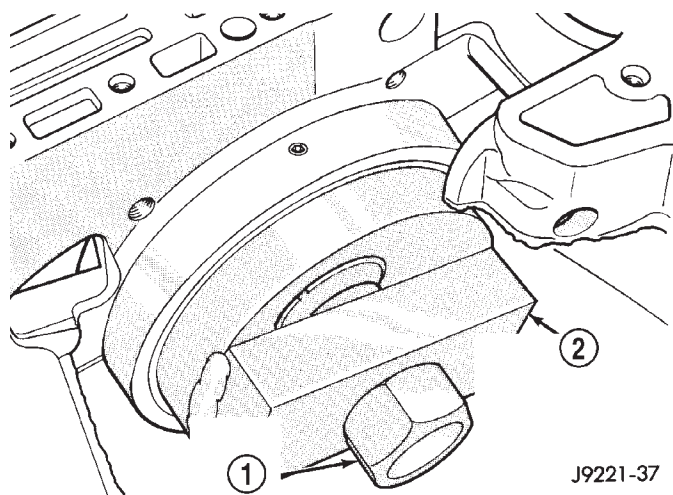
Positioning Adapter Tool In Overdrive Piston Retainer
